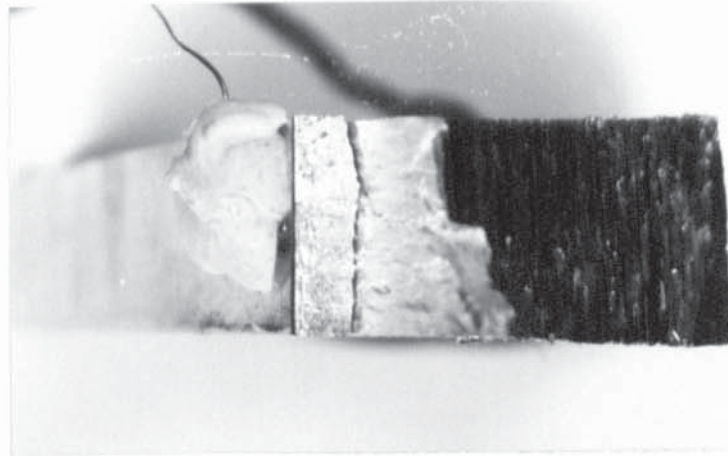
Physically Short Through-Thickness Crack Specimen.
